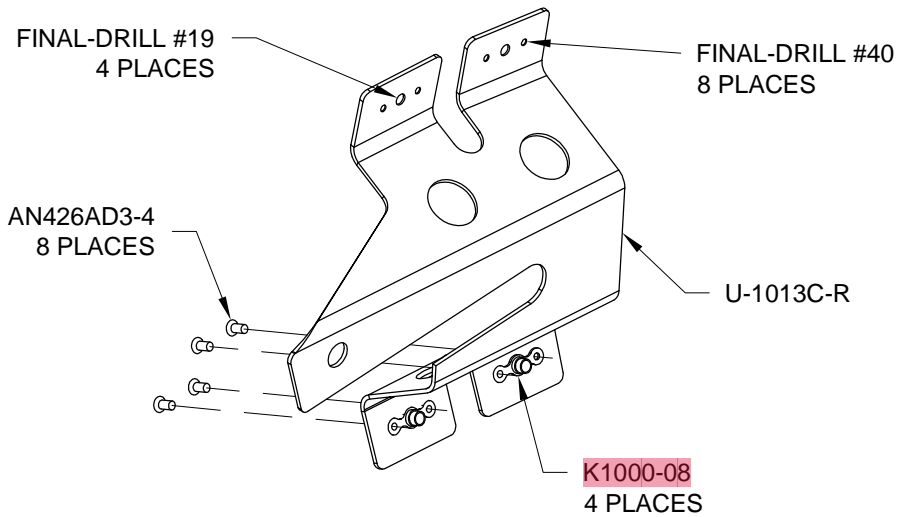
DRILLING AND TAPPING NOSE WHEEL - FAIRING BRACKETS
